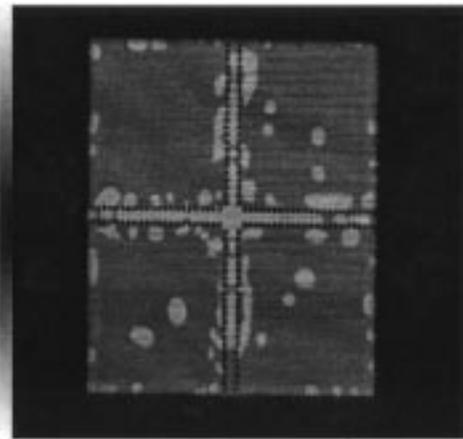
C-SAM image of the assembly after standard reflow profile.
